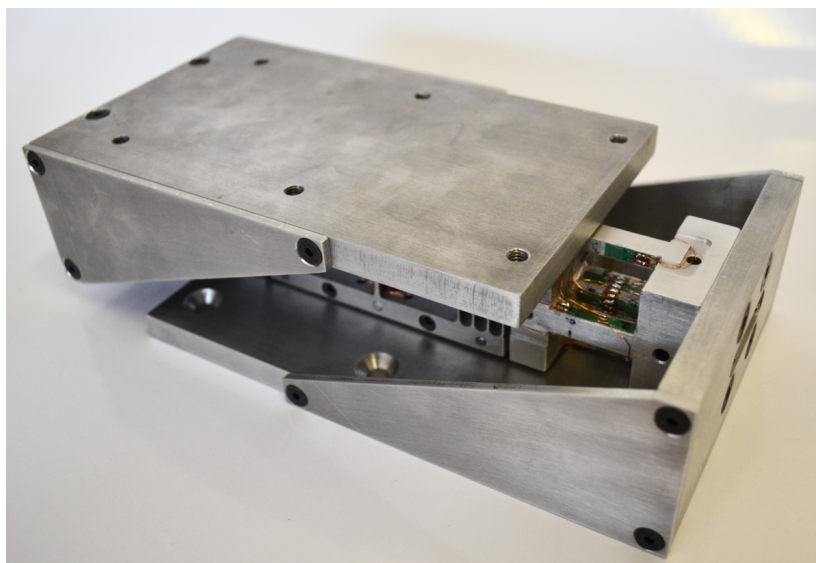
Assembled 6-component balance, complete with mounting brackets.
